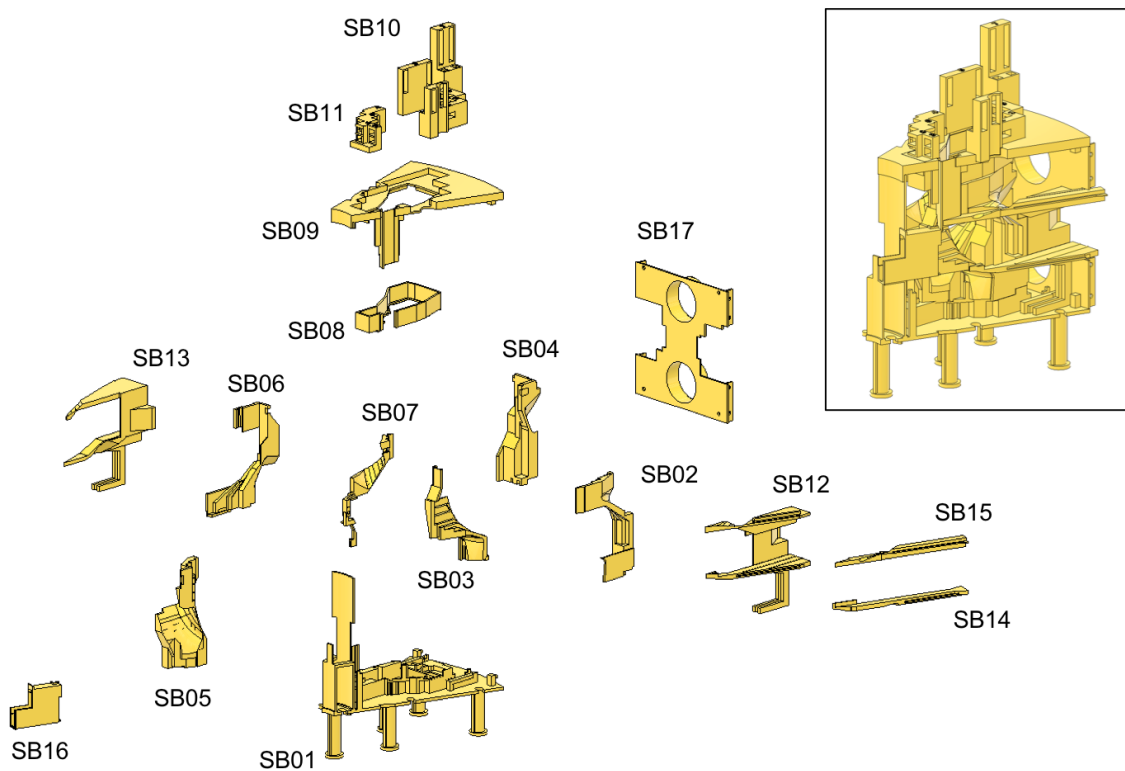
Exploded view of the SB cartridges in a 1/10 section. Assembled view is shown in the box on the upper right-top.
